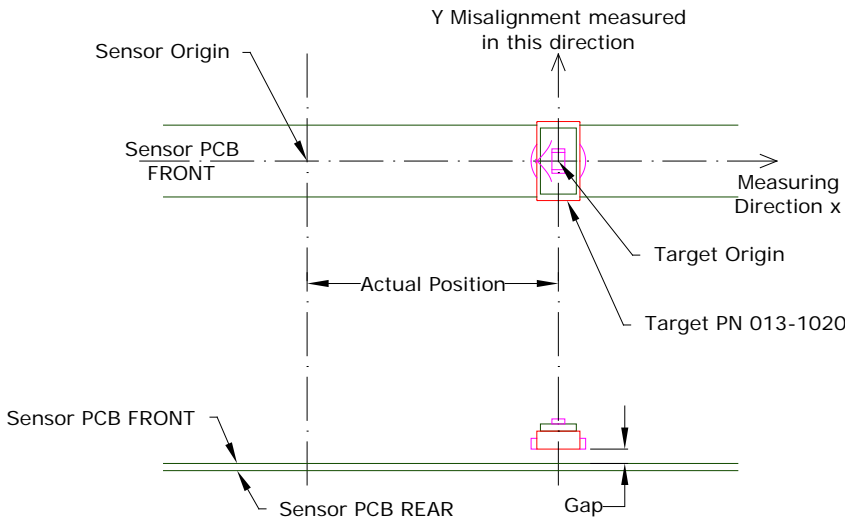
Alignment of sensor PCB assembly 013-0035 with target 013-1020
